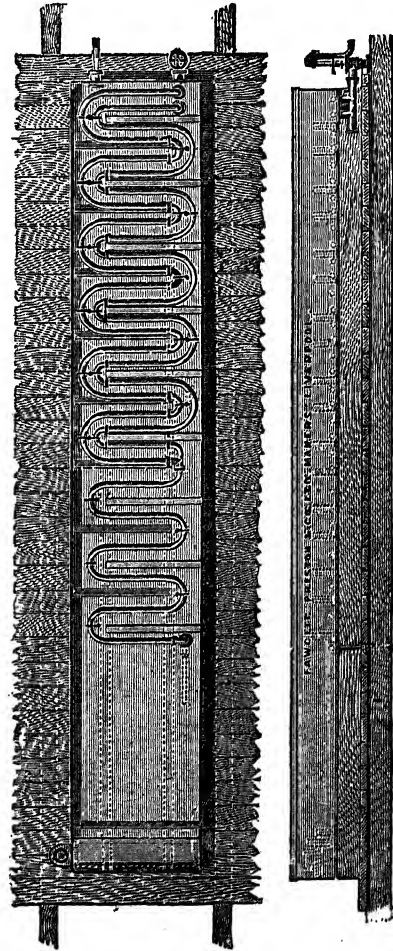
Plan and elevation of continuous open cleaning and evaporating steam train.
